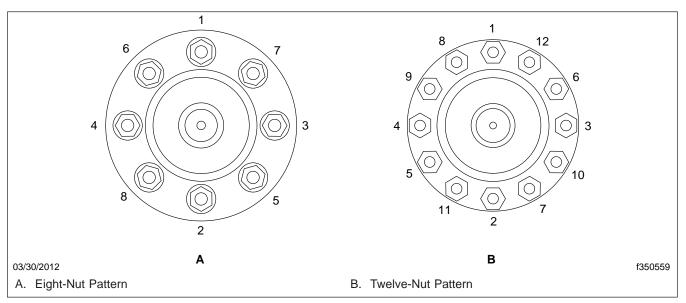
, Tightening Sequences, Axle Shaft Flange Nuts
